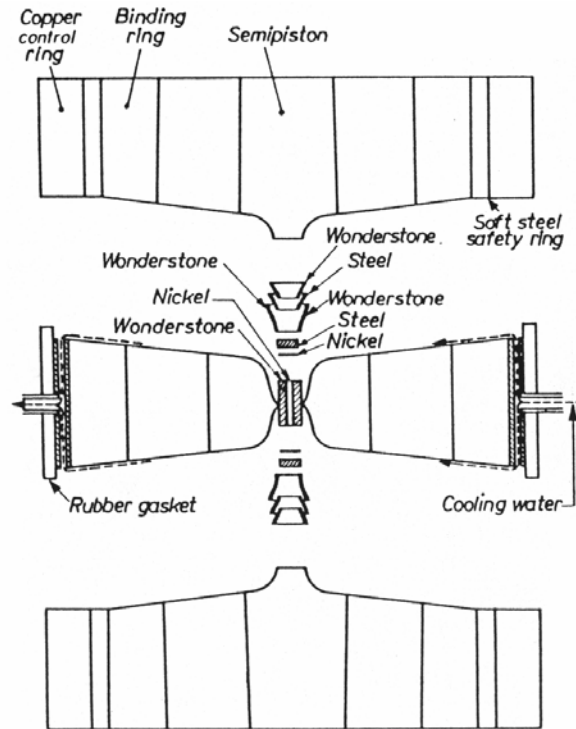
The "belt," a high-temperature, high-pressure apparatus; "exploded" assembly. After Hall (1960).
